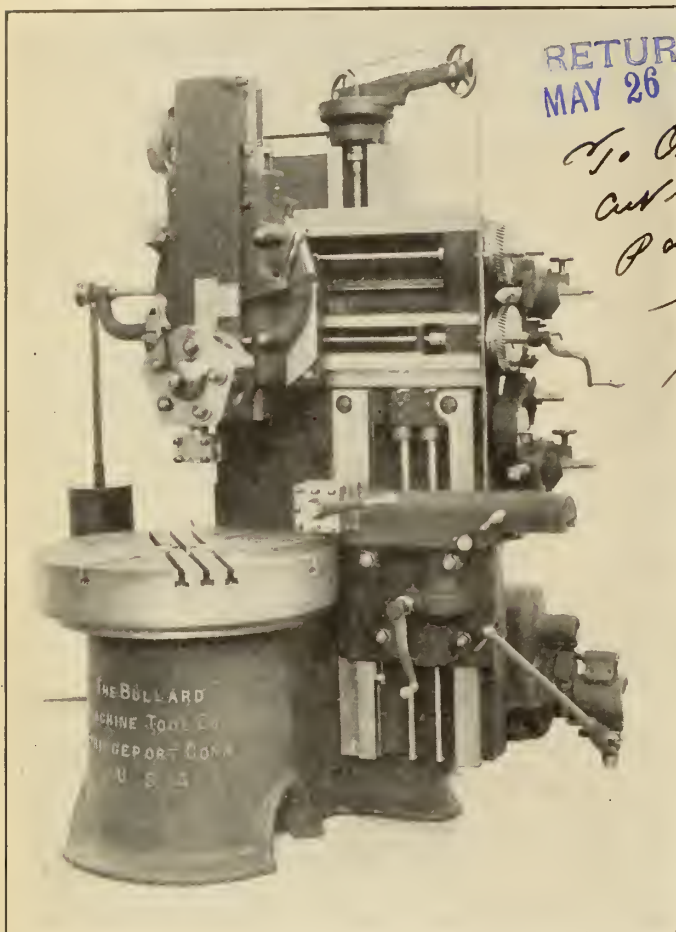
Front View of Bullard Vertical Turret Lathe.
